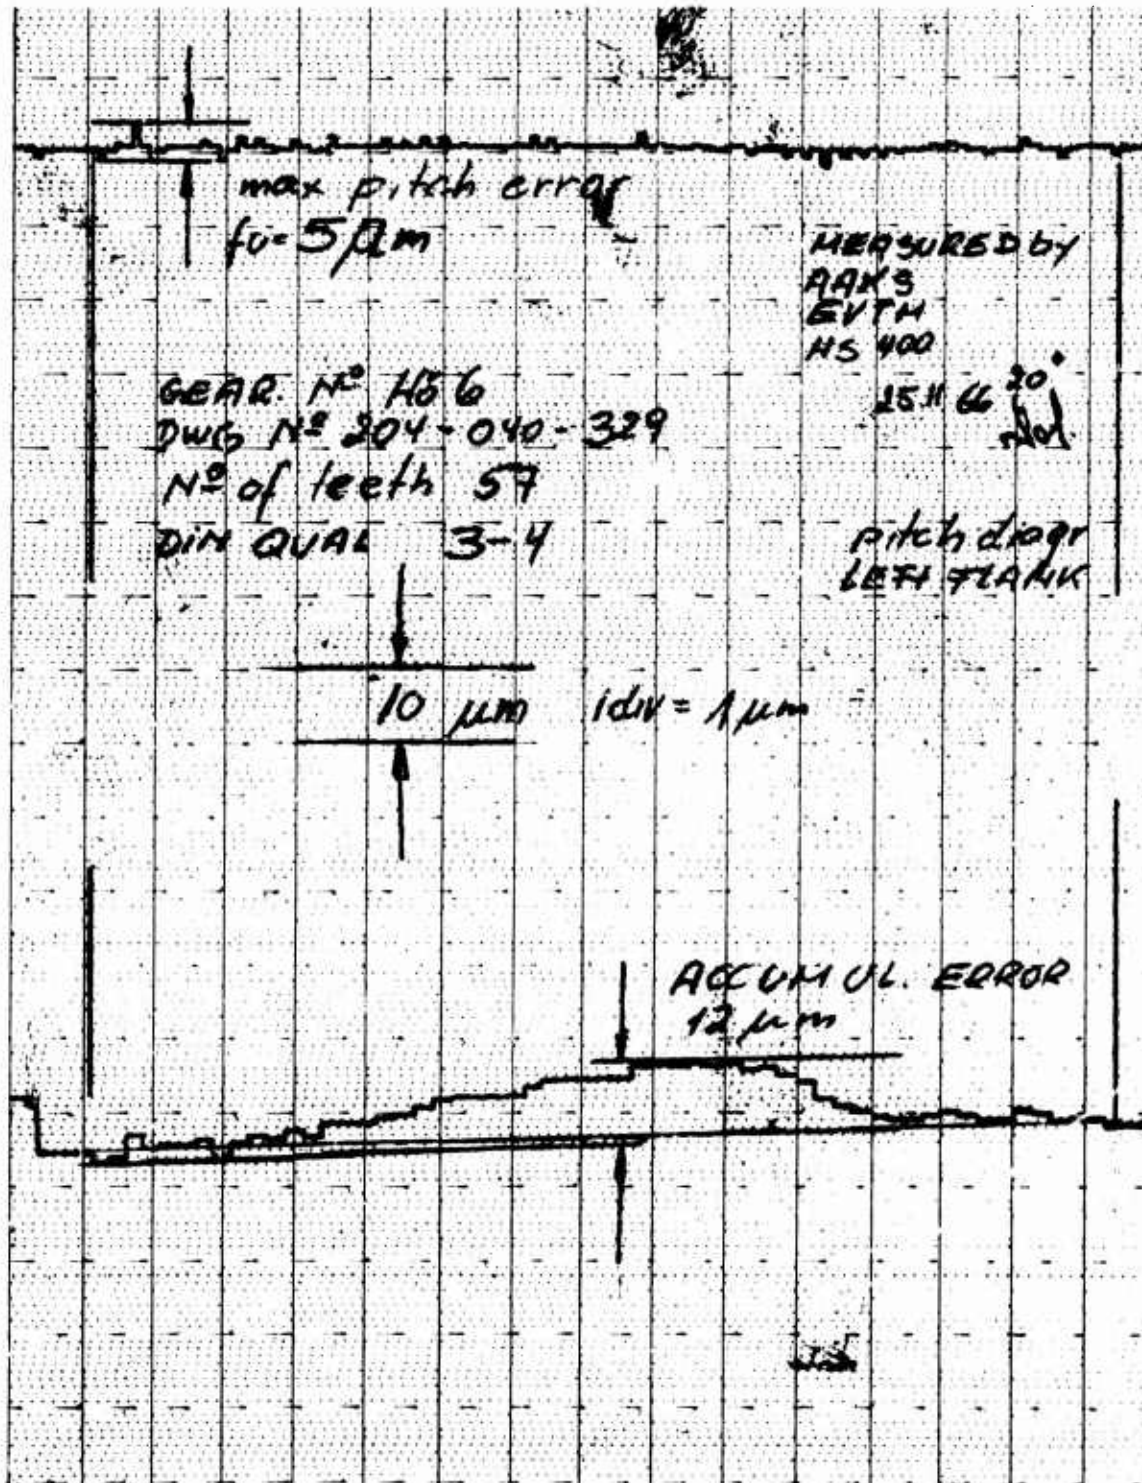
Tooth Spacing Measurement of the Lower Planetary Scage Sun Gear as Measured on the Hofler Gear Measuring Machine.
